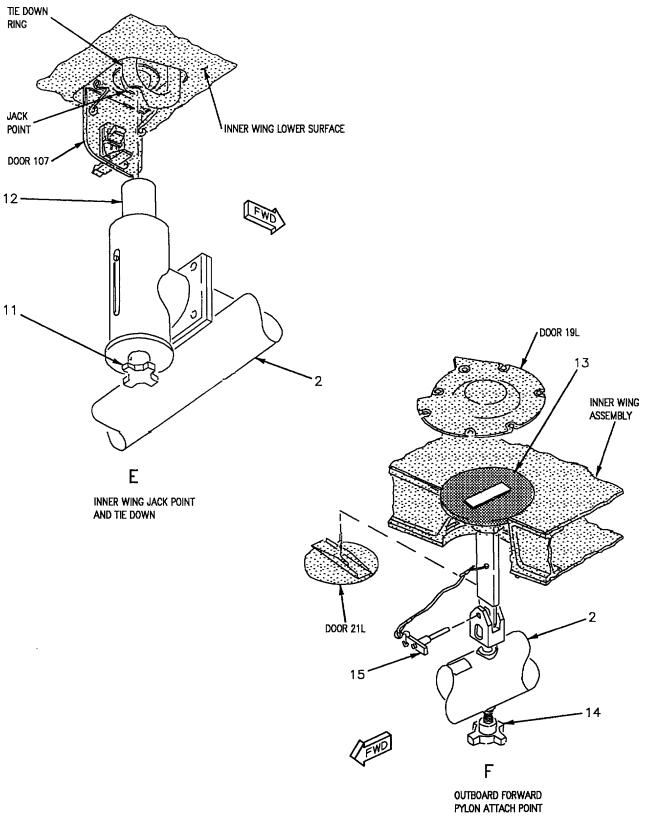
Inner Wing Removal and Installation Adapter (Sheet 4)
